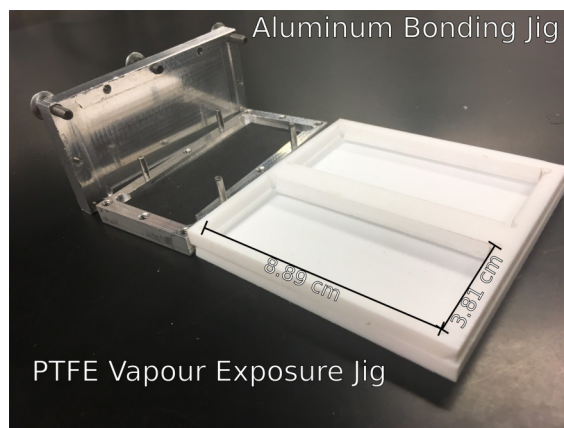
Components required for the solvent bonding of PMMA. In the front right are two PTFE pieces. The top piece contains recesses for holding the PMMA chips, while the bottom is a bath for the chloroform. A lid is also used to cover the assembly during exposure. On the left is the aluminum bonding jig for applying pressure to the bond by sandwiching the PMMA between two nitrile sheets and compressing the assembly with screws.
